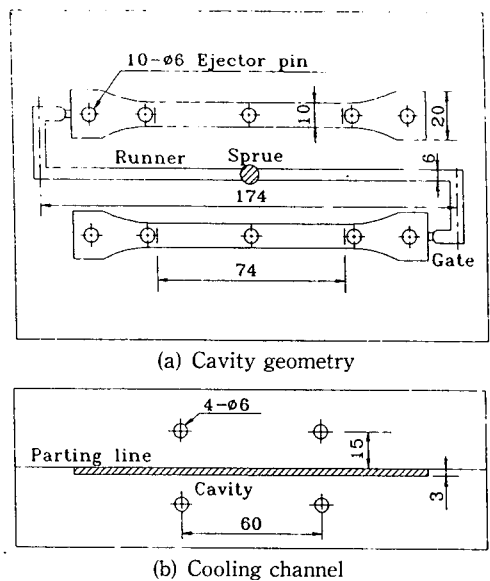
Cavity geometry (a) and cooling channel configuration (b) in the mold
